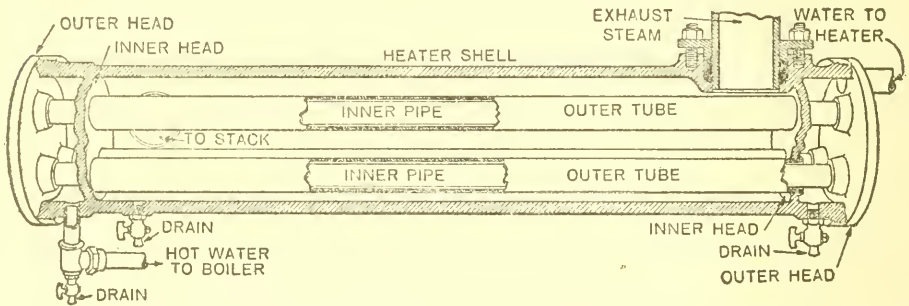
SECTIONAL VIEW OF "CASE" CAST-SHELL HEATER.
